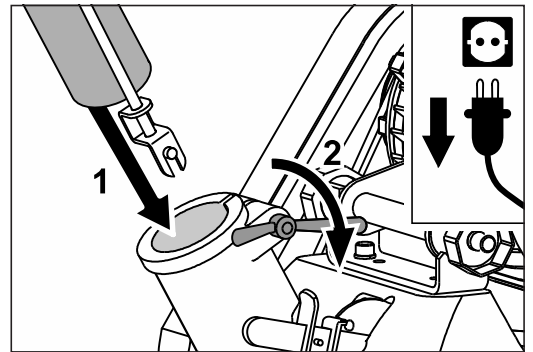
Insert the guide tube into the opening in the machine housing (1). Tighten the wing nut (2).
